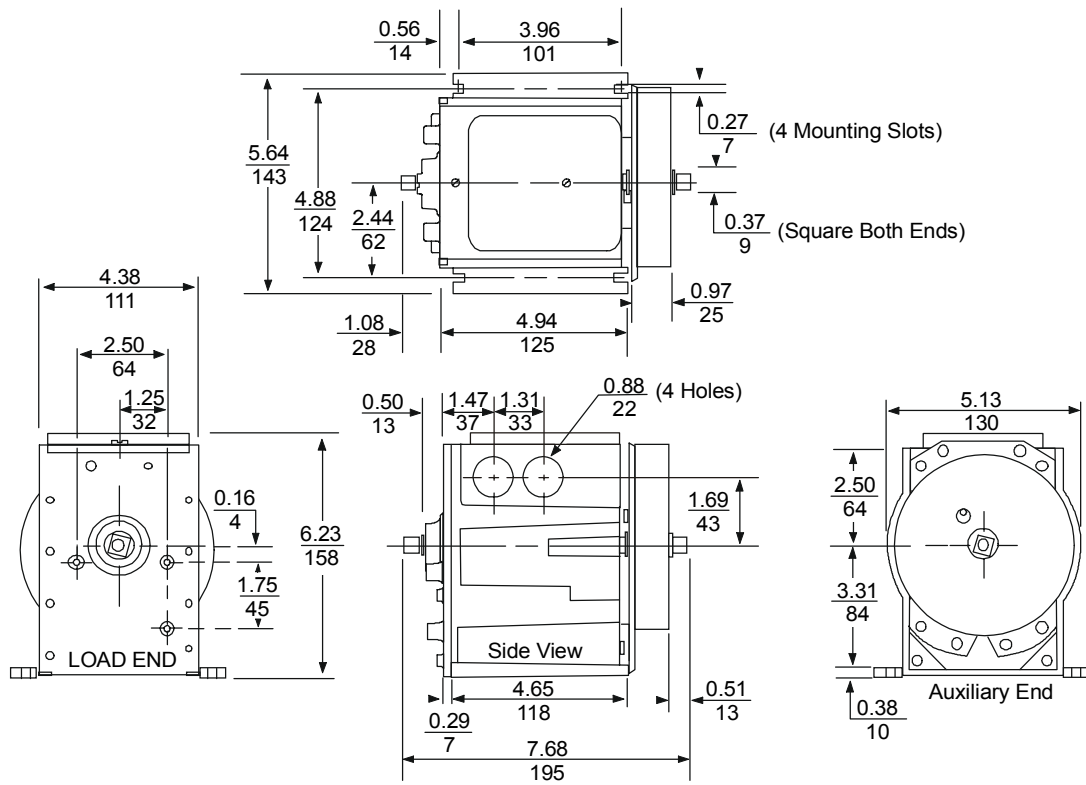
M100E Spring Return Actuator Dimensions, in. (mm)
